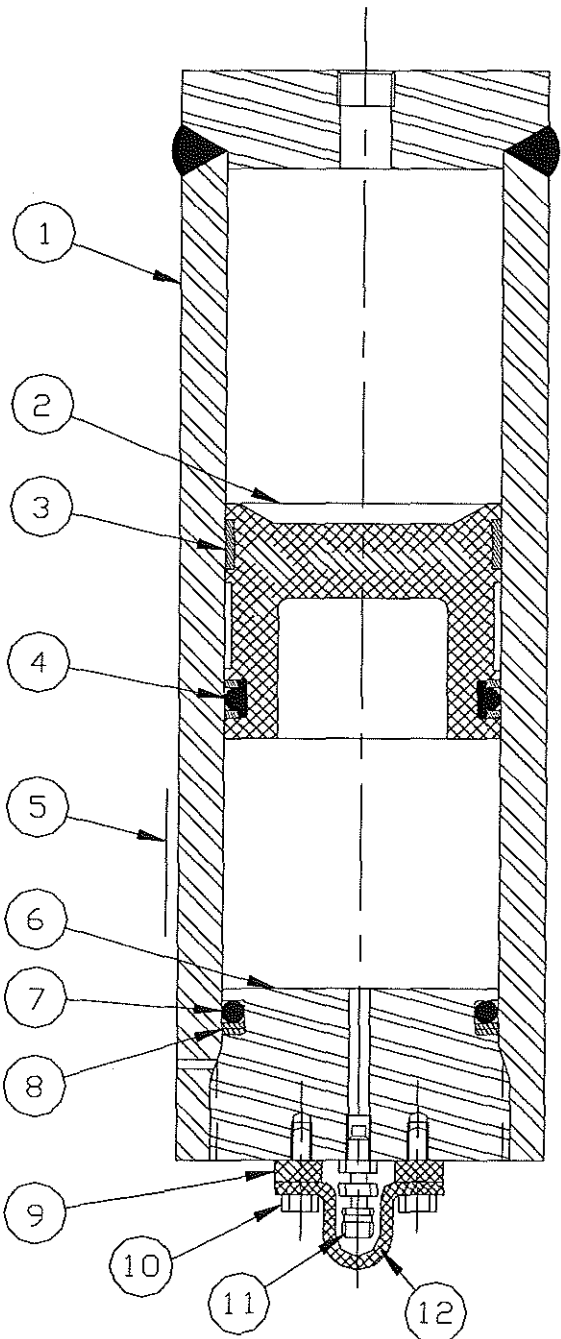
ACCUMULATOR ASSEMBLY - EARLIER VERSION
